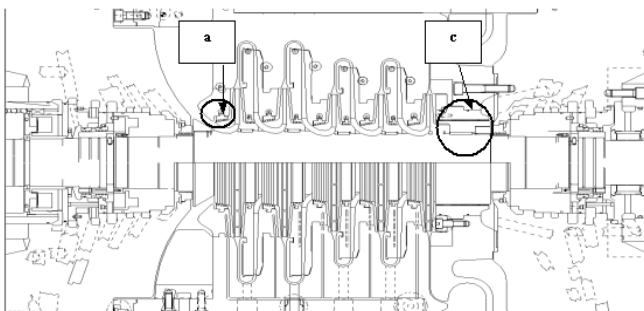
BCL 405B Straight-Through Compressor Casing Cross Sectional Drawing: Detail of Rotor and Seals (a: Impeller Shroud Seal, c: Honeycomb (Final Balance) Seal).
